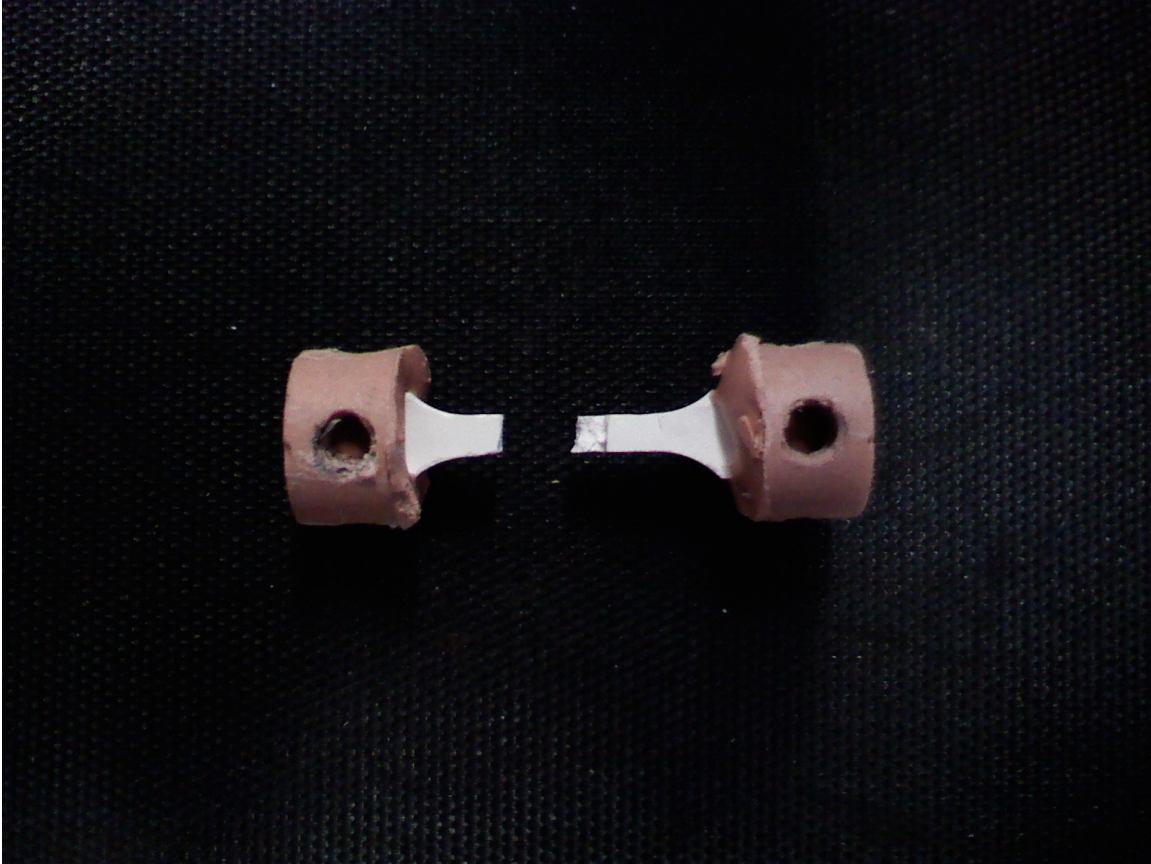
Post fracture specimen removal from the test fixture showing the typical fracture pattern.
